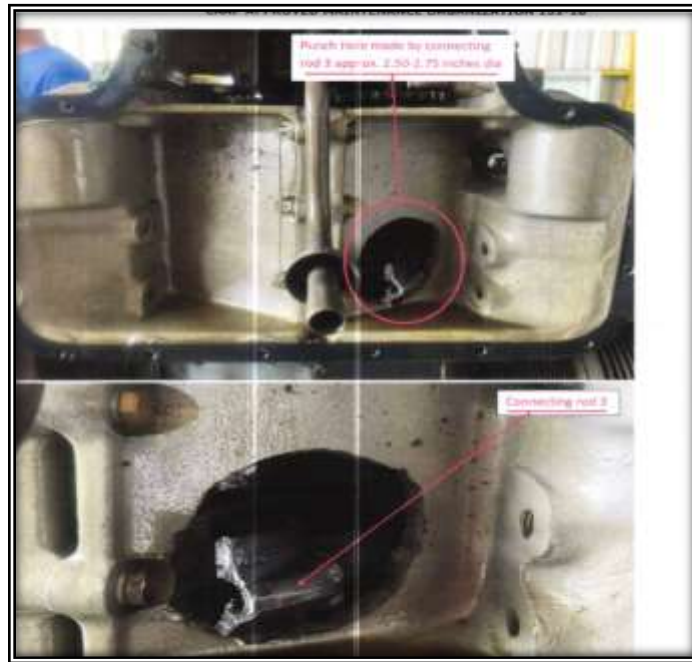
and 4 - Punch hole made by the connecting rod number 3
